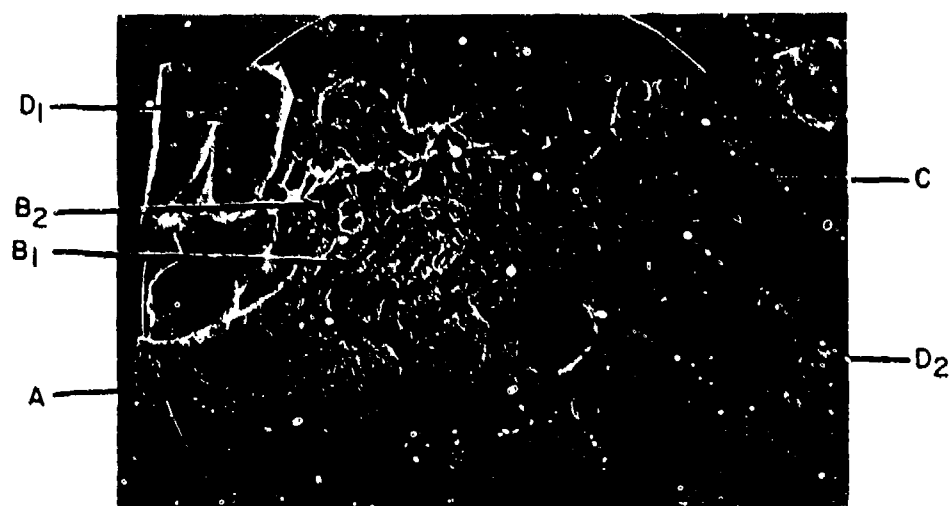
Fatigue fracture surface of a hydrogen-embrittled A-514 weldment containing porosity, 8x.
